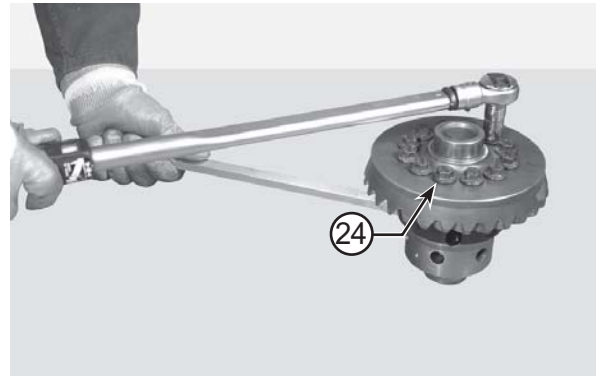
Tighten the capscrews of the crown wheel using the criss-cross method. Torque wrench setting: 78 - 86 N·m
